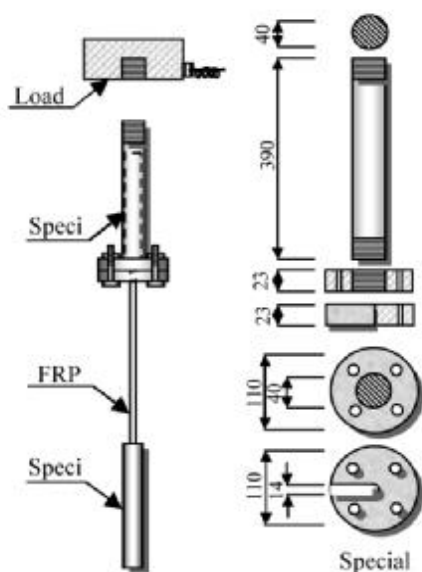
Schematic diagram of special assembly details and dimensions [4]
